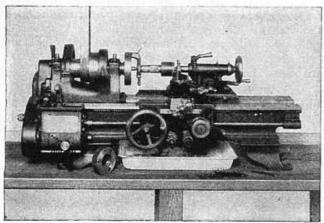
Making a Master Tap in an 11-inch Quick Change Gear Bench Lathe
